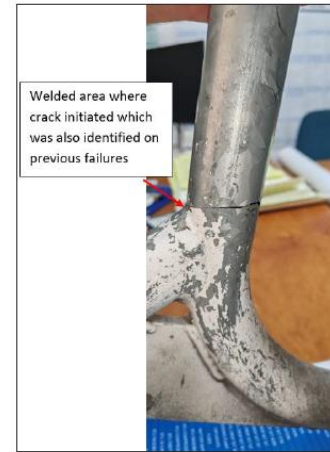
Failure Zone at Tubular Frame Weld
